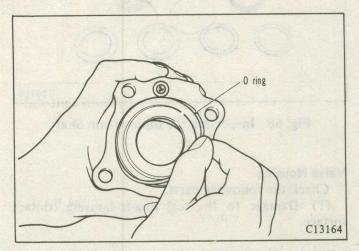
Removal of Seal Ring and O ring from Valve Housing
